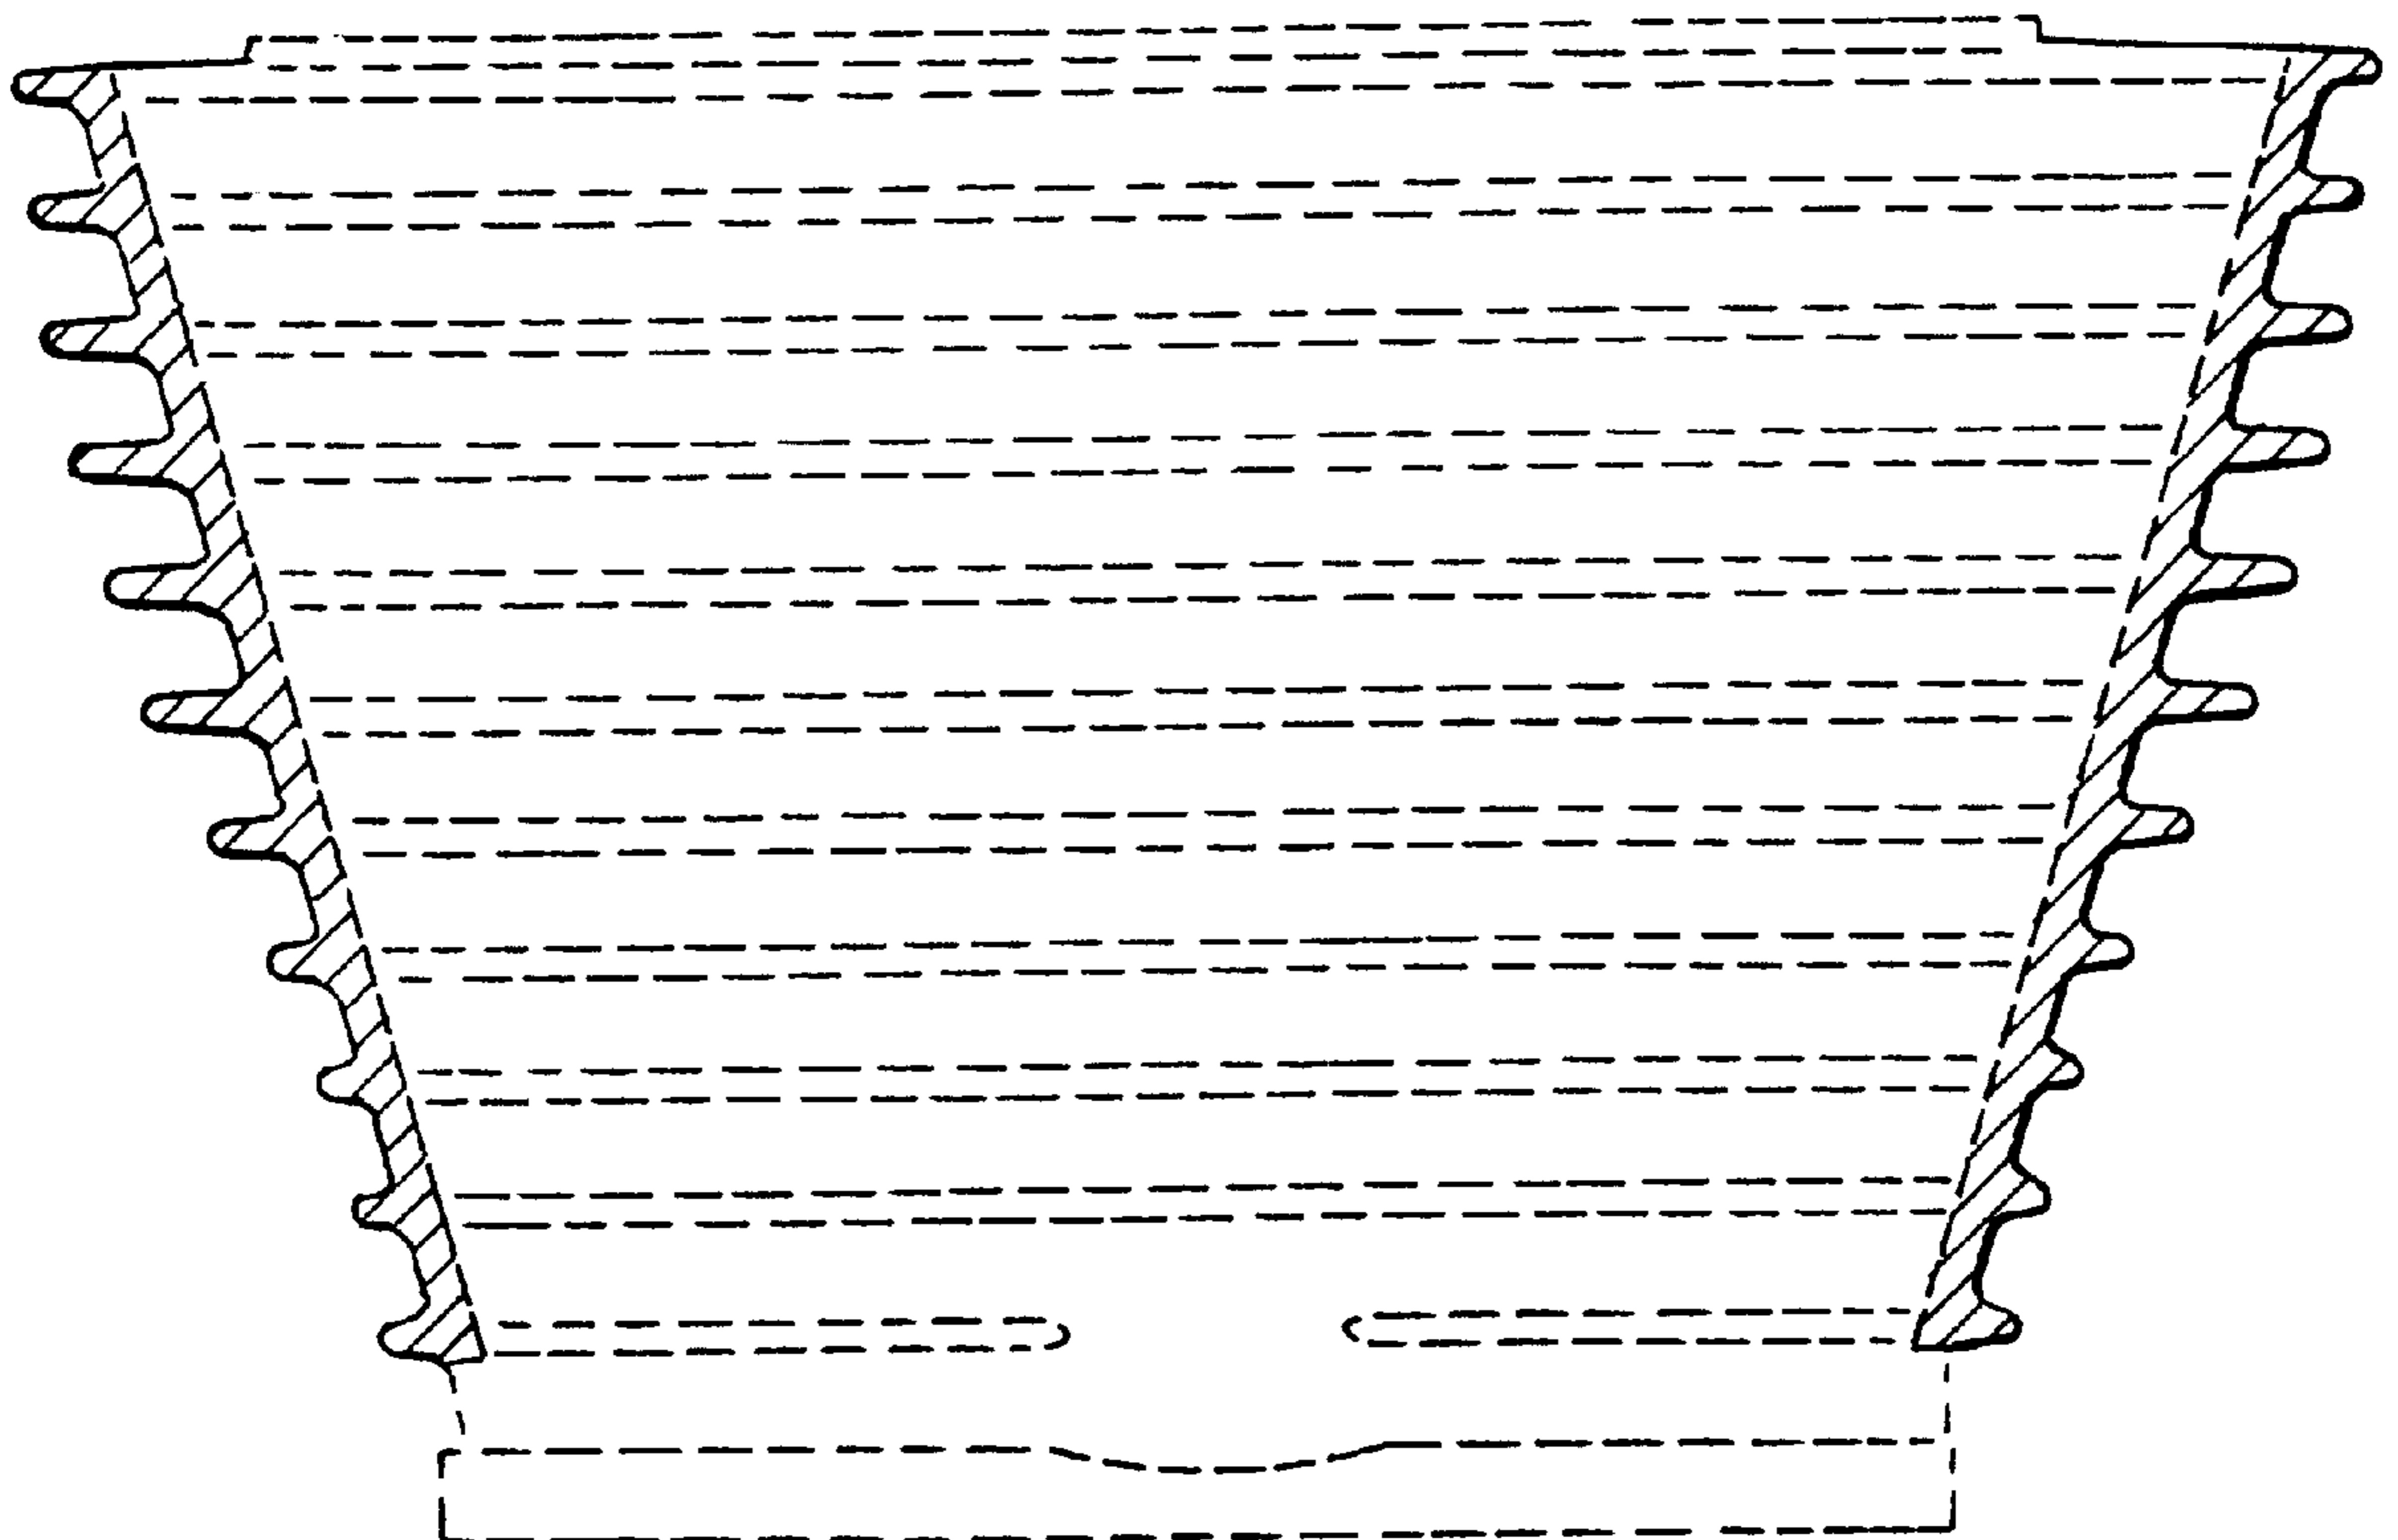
is a side view of a side portion of a motorcycle cylinder embodying the present invention while in use; and, FIG. 2 is an enlarged cross sectional view taken from the center of the side portion of a motorcycle cylinder.
